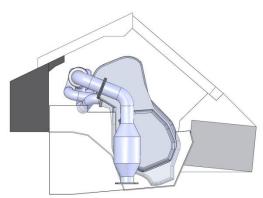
Side View of Engine Compartment Showing Exhaust Clearance
